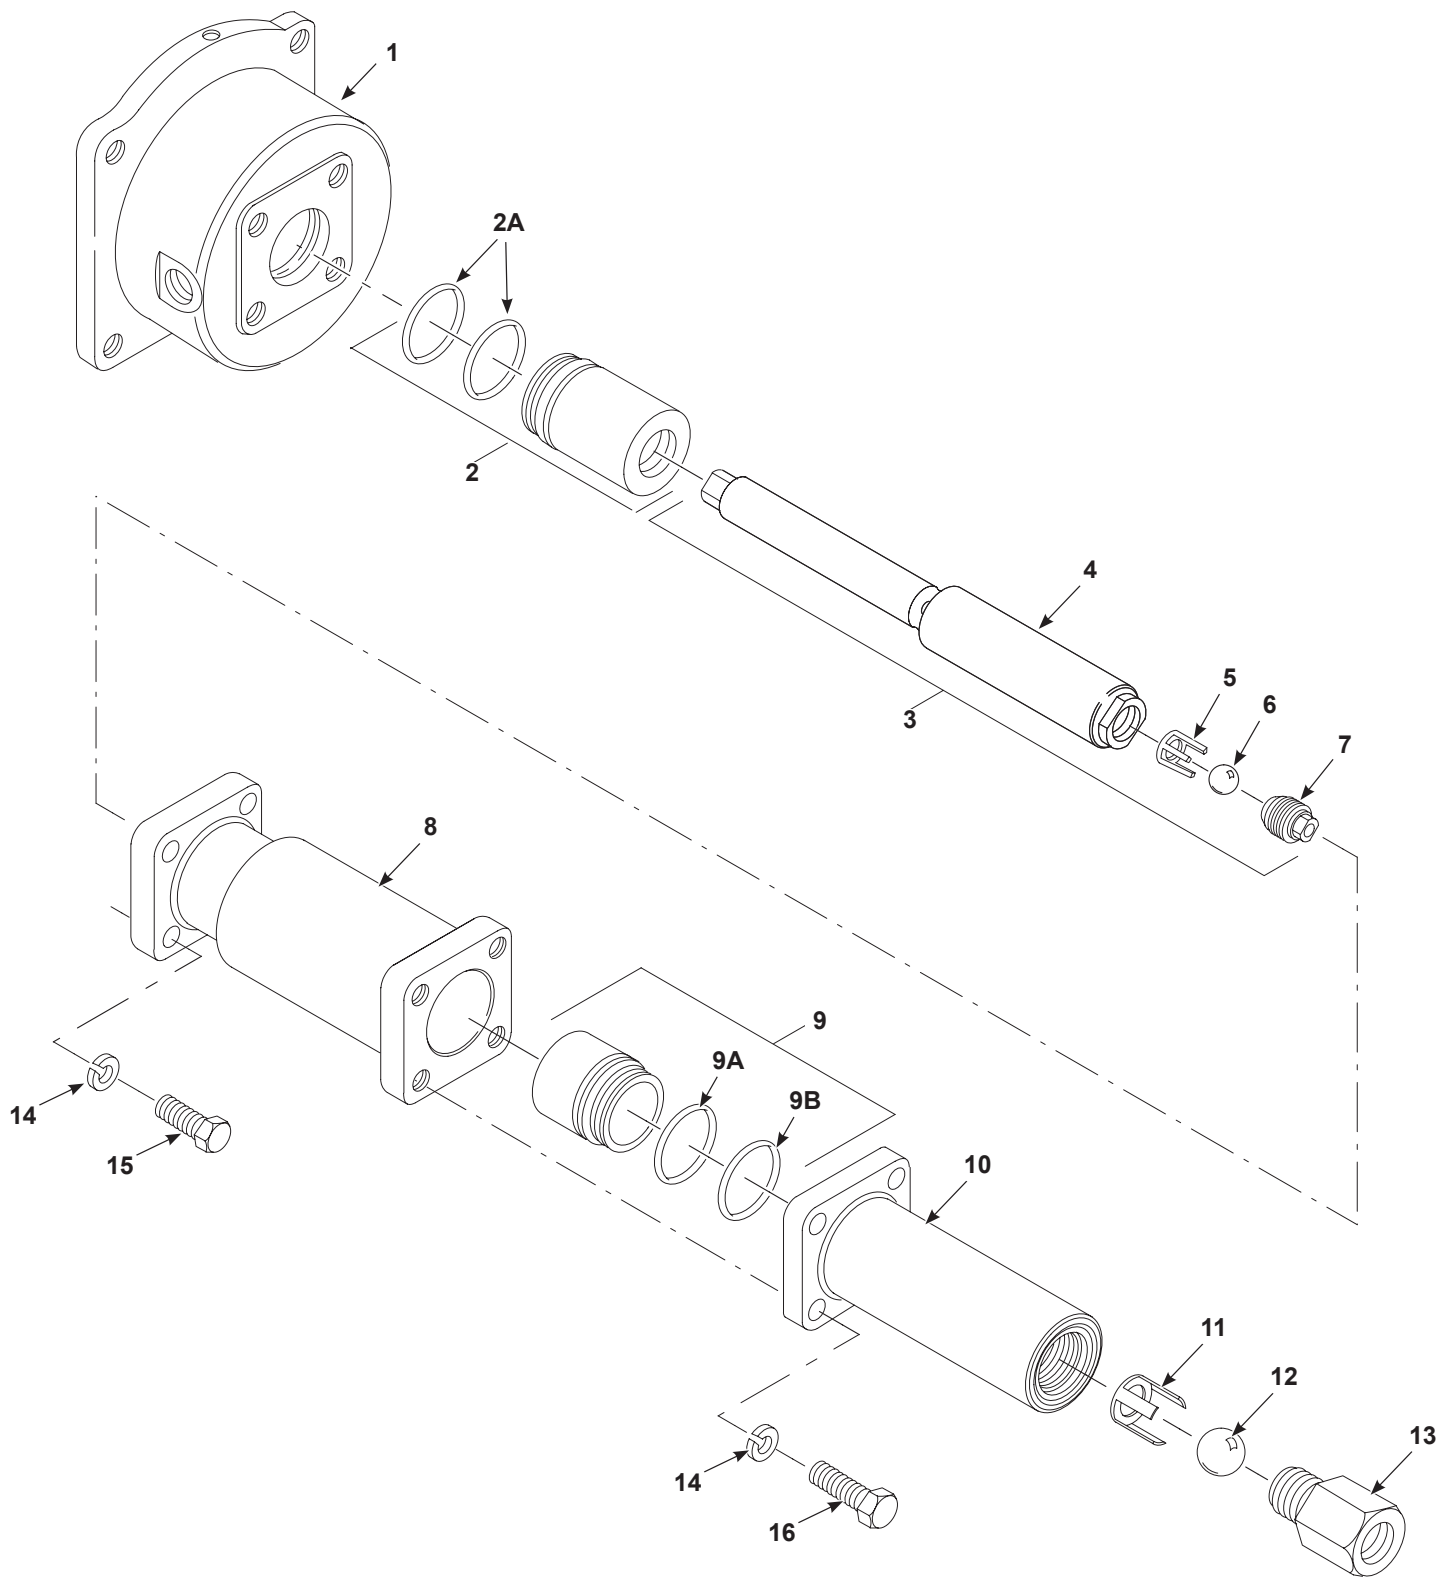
16:1 Stainless Steel Hydraulic Section Parts
